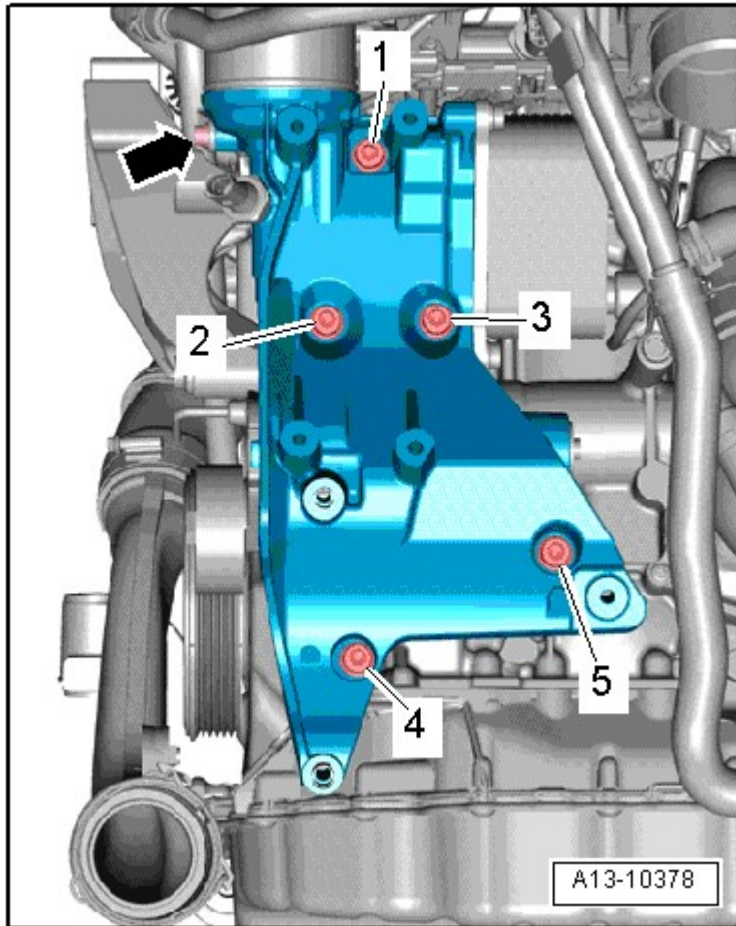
Identifying Accessory Assembly Bracket Tightening Sequence
